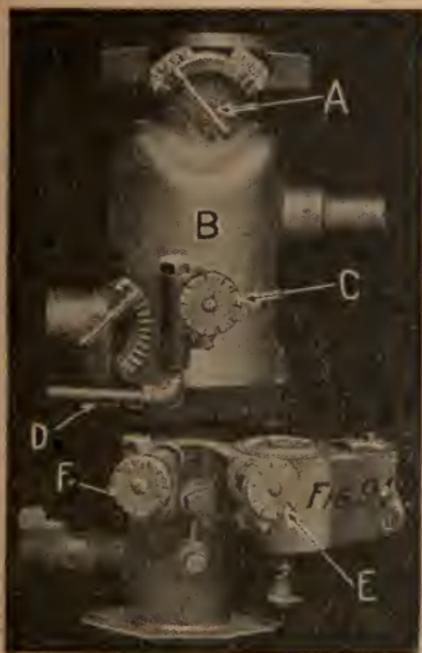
View of kerosene mixer and water injector, showing adjusting devices.
